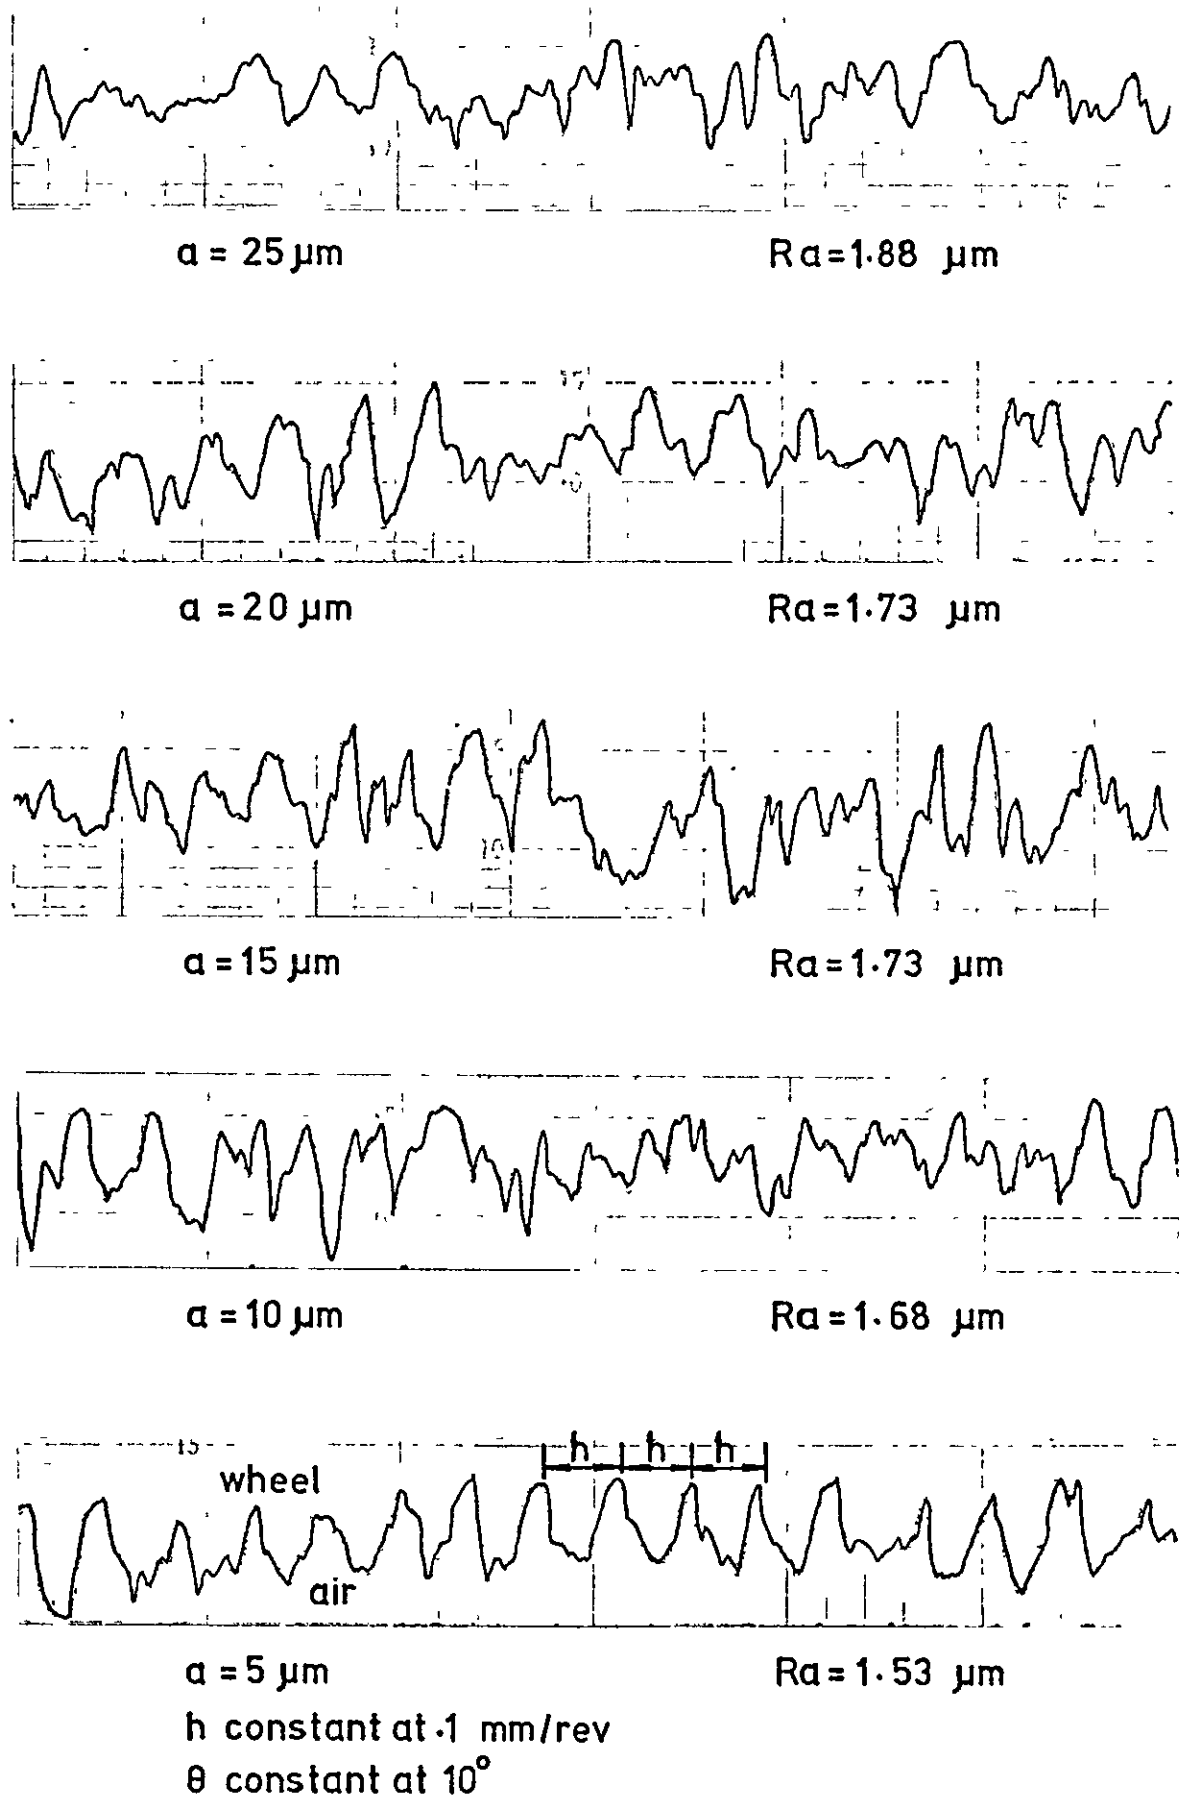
"Talysurf" traces of grinding wheel surface
